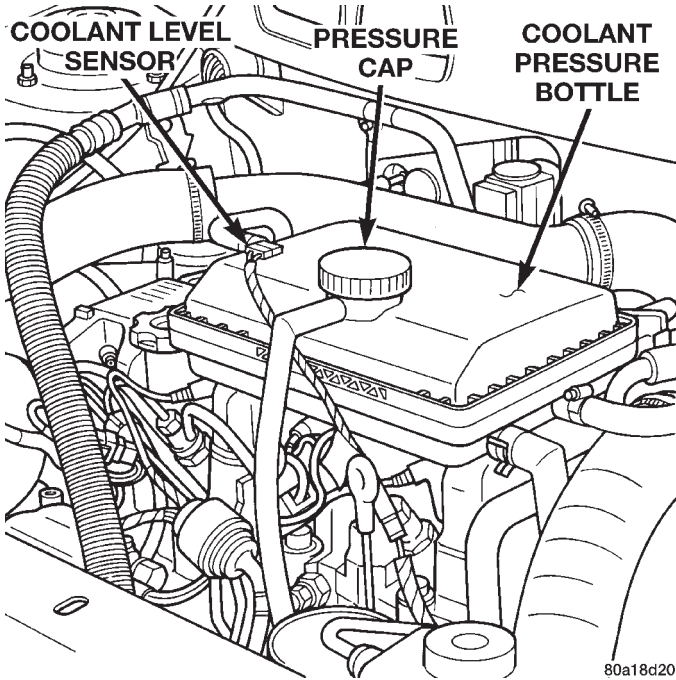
Coolant Pressure Bottle—2.5L VM Diesel
